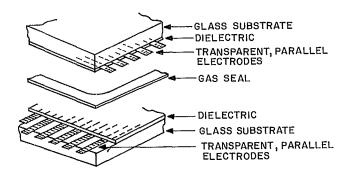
Exploded Schematic View of a Portion of a Plasma Panel
